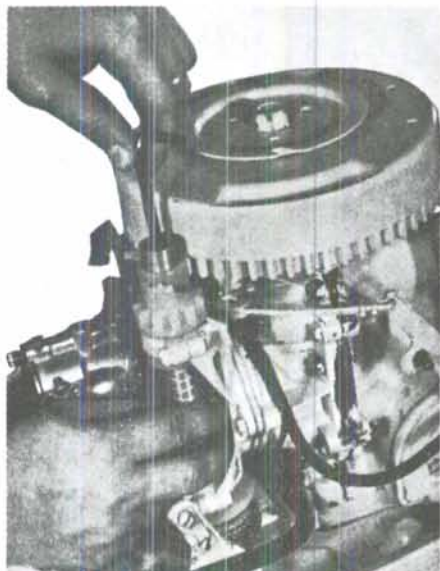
View of special "Tee" handle tool (No. T-3139) for removing and installing starter recoil spring assembly.
